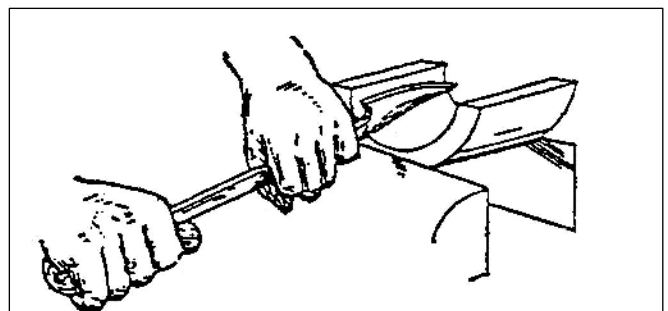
Relieving a bearing is an important operation. The depth of the scraping should be even. It generally extends to about 30 degrees below the horizontal centerline.
